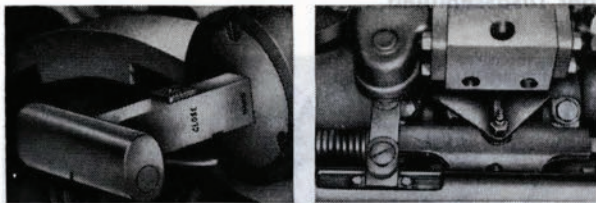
Power-Operated Muzzle Door Mechanism Controls Set for HAND Operation—Control Valve Operating Handle at HAND (Left) and Control Valve Arm in Center Position (Right).
